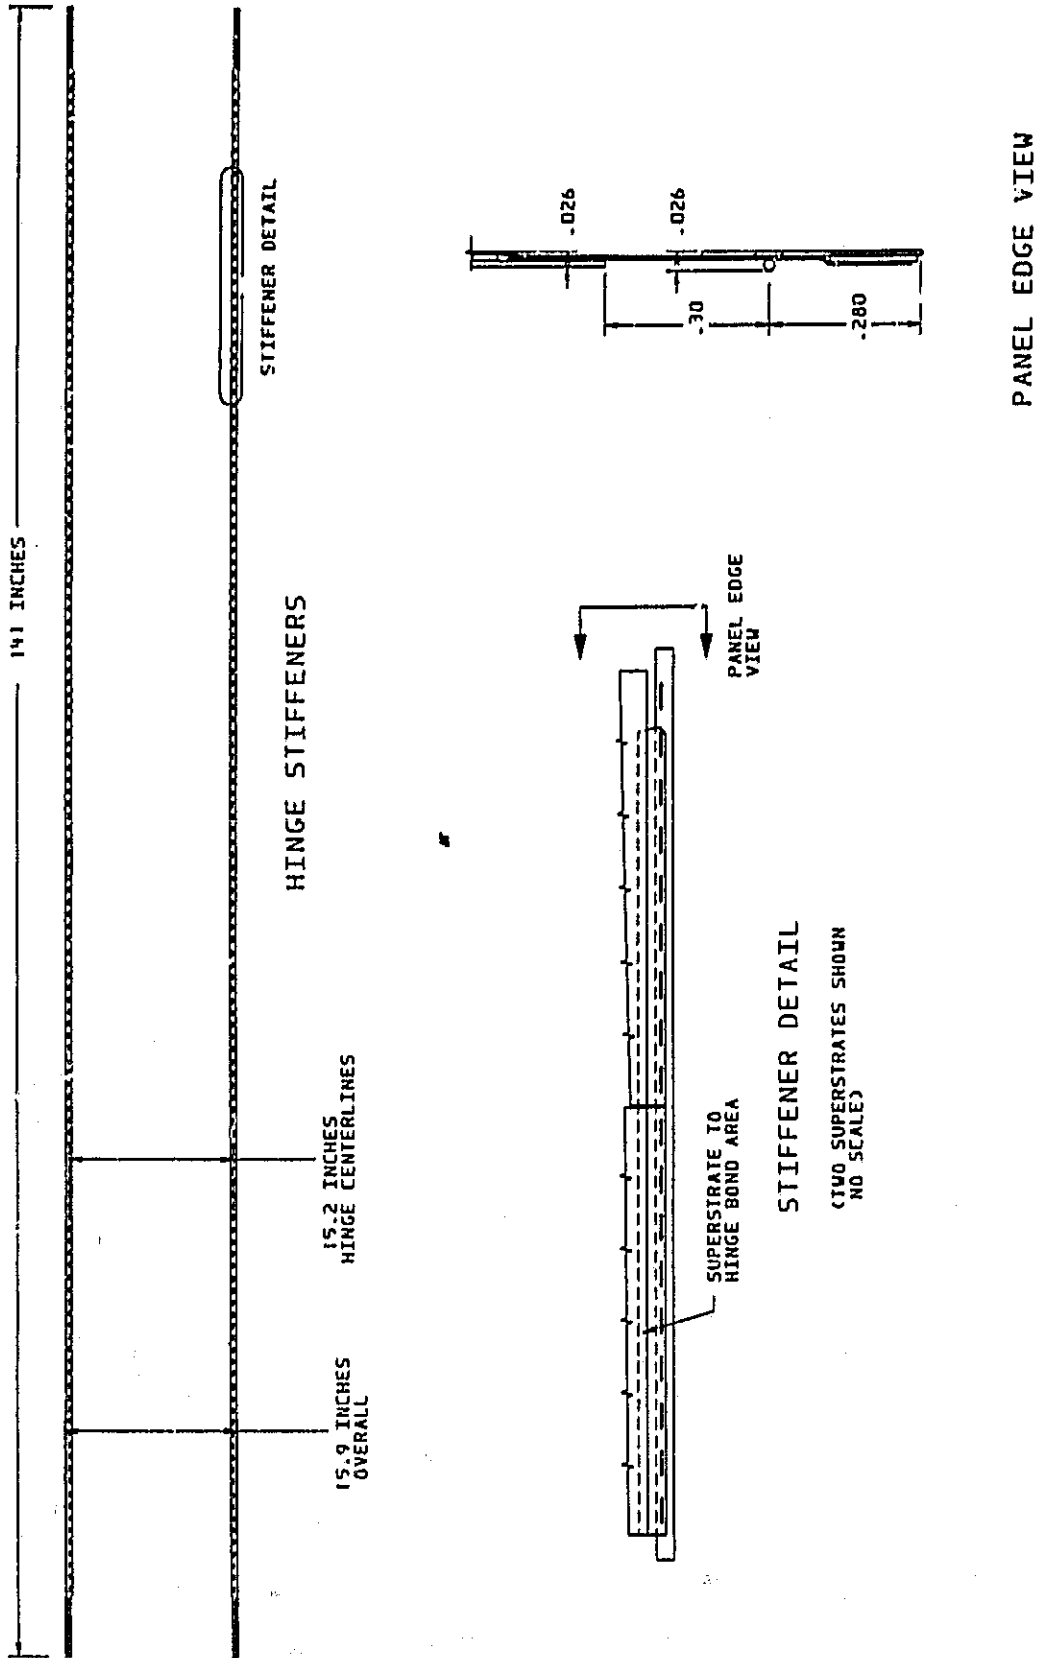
Panel Structural Support - Hinge Stiffeners
